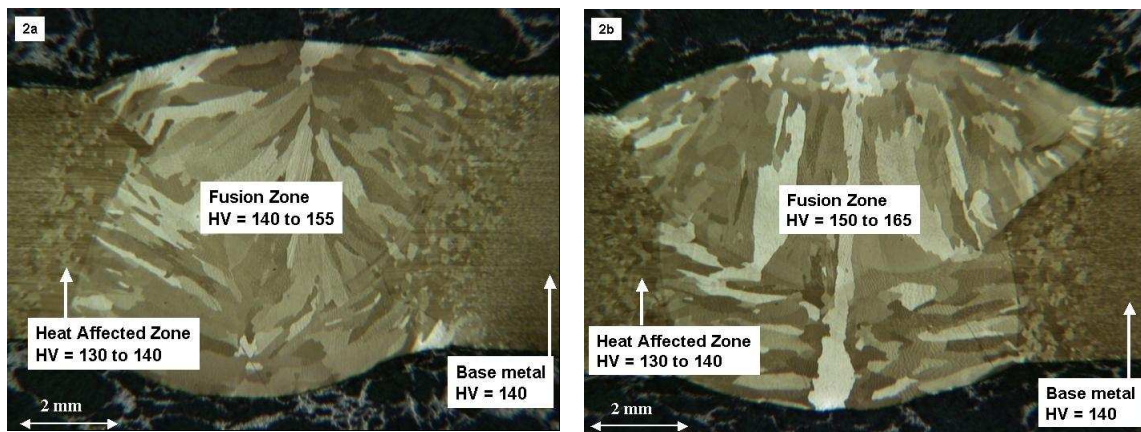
Cross section of welded joints performed in industrial condition. (a) automatic PAW + GTAW. (b) Manual GTAW. The micro-hardness of the fusion zone is higher than that of the base metal.
